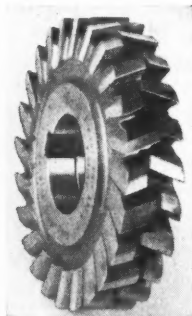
Barber-Colman Interlocking Side Mill Cutter
